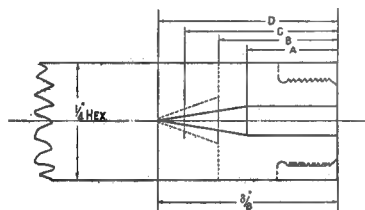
Drilling diagram. "A"— $\frac{3}{16}$ in. deep— $\frac{1}{16}$ in. drill; "B"— $\frac{1}{8}$ in. deep—No. 60 drill; "C"— $\frac{5}{16}$ in. deep—No. 75 drill; "D"— $\frac{3}{8}$ in. deep—reamer
